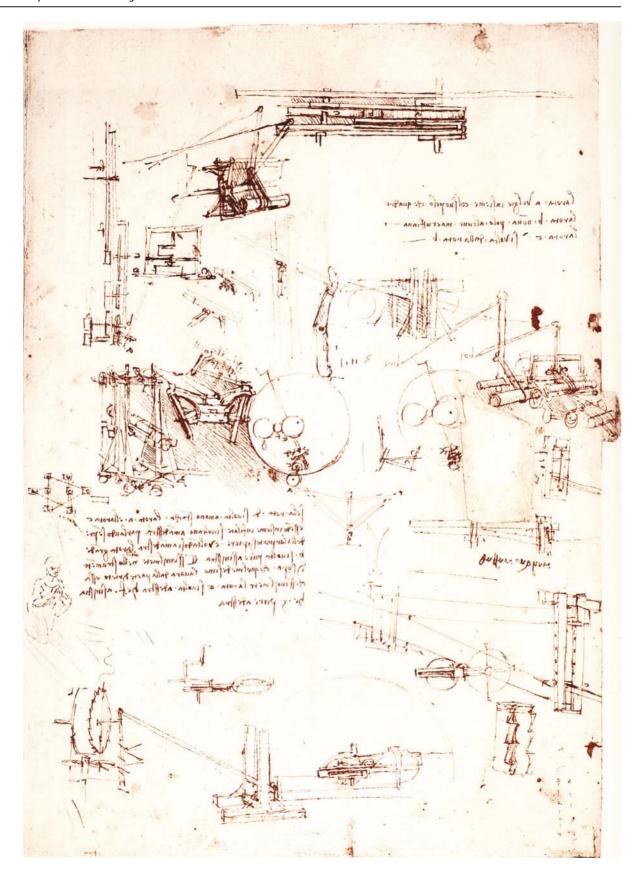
CA, f. 366 r-a [1021 r]. Close-up of cable man
